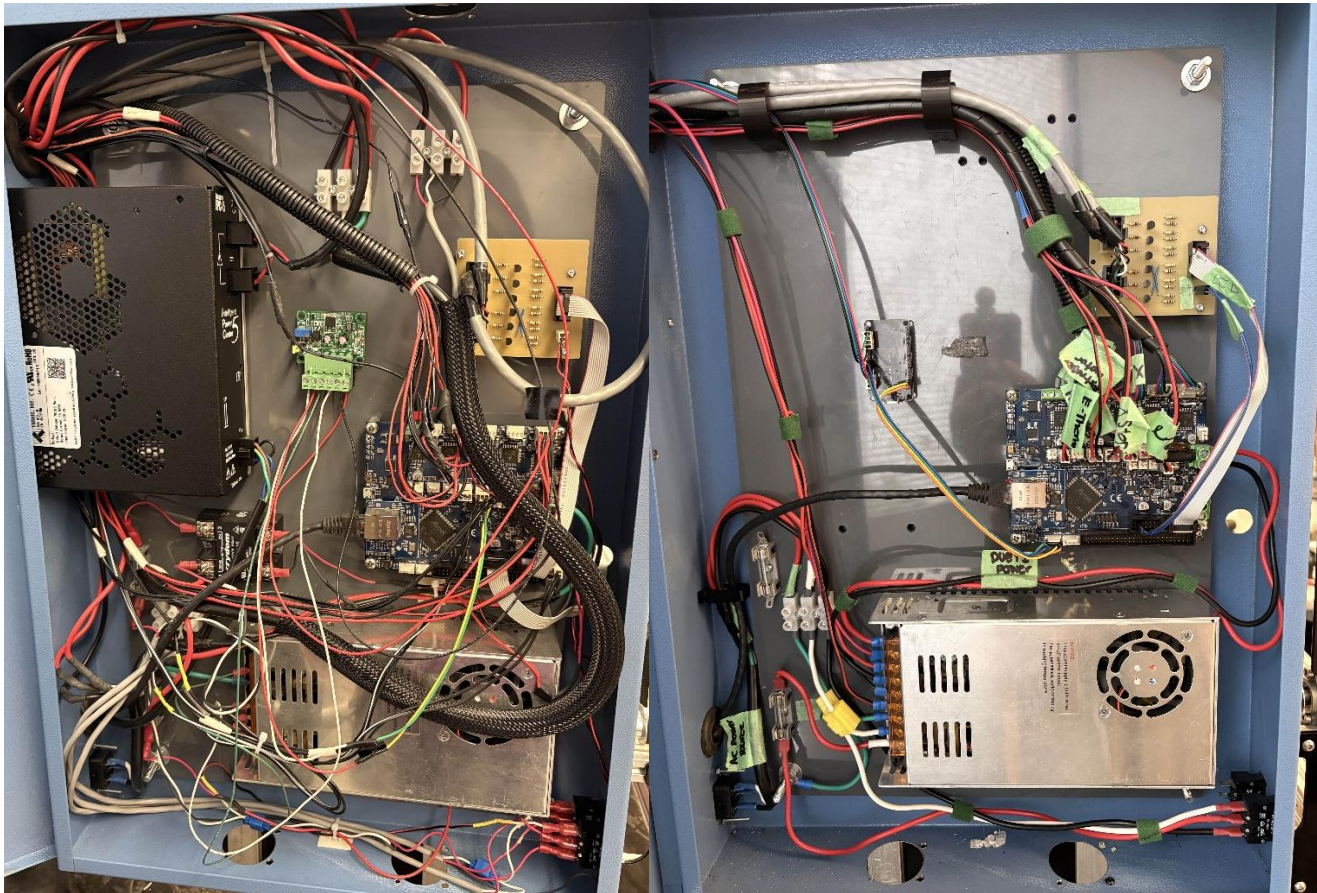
Figure E - Cable Management Evolution: Initial soldered prototype wiring (left) vs. improved continuous wire routing (right)
